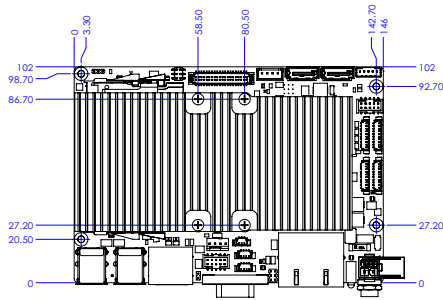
MIO-5393 Mechanical Drawing (with Heatsink)
